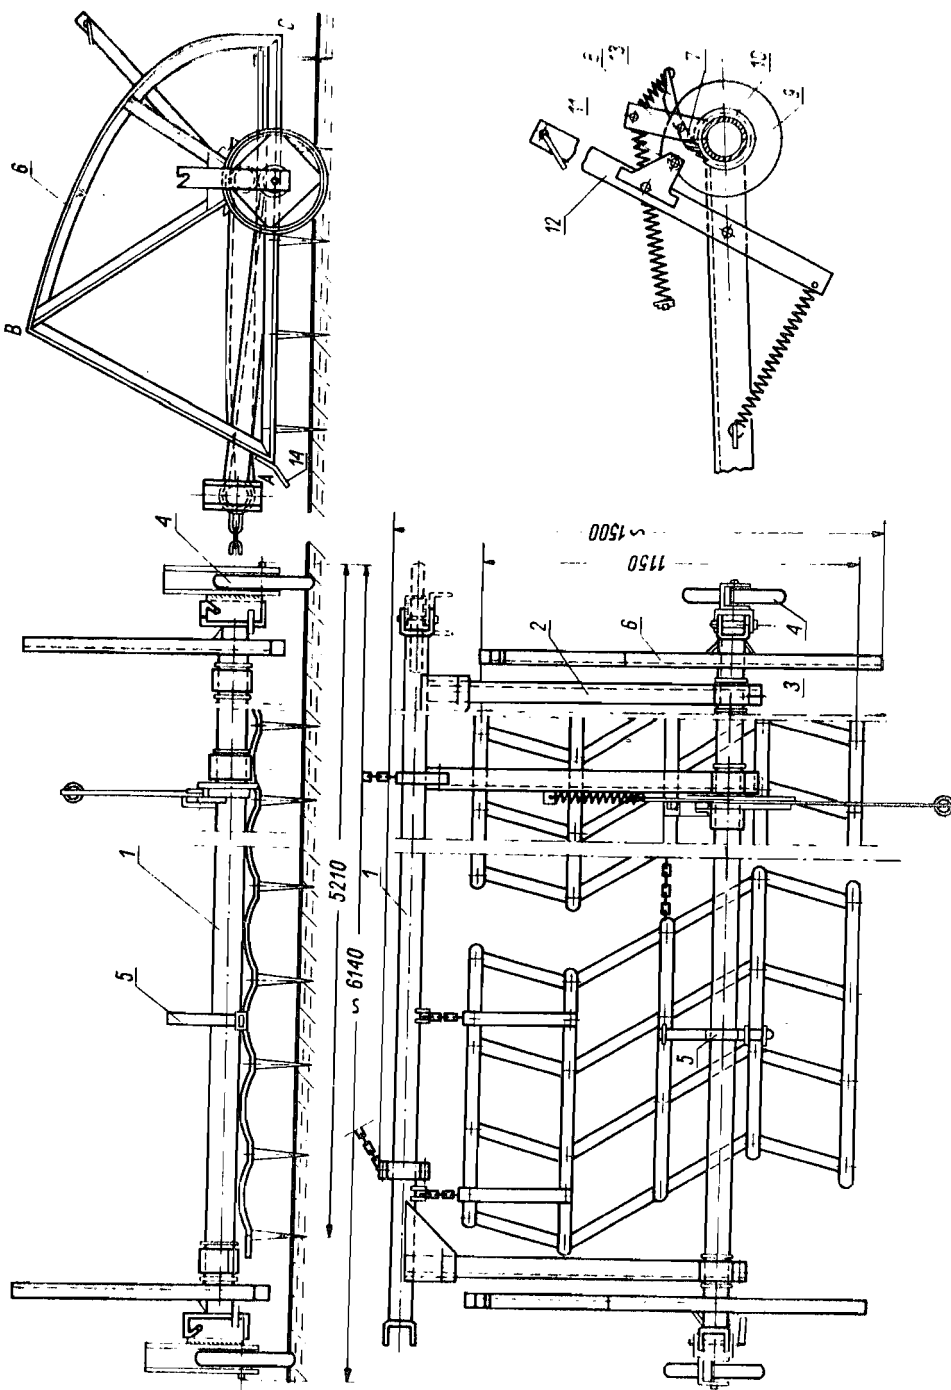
Tractor-trailed harrow with device for raising harrow sections and the pawl mechanism of the power lift: 1 — hitch-bar; 2 — outriggers; 3 — lifting-beam bearings; 4 — supporting wheels; 5 — section hangers; 6 — bows; 7 — pawl finger; 8 — pawl arm; 9 — pawl wheel; 10 — pawl wheel; 11 — disengaging lever; 12 — pawl spring; 13 — pawl spring; 14 — bow lug.
